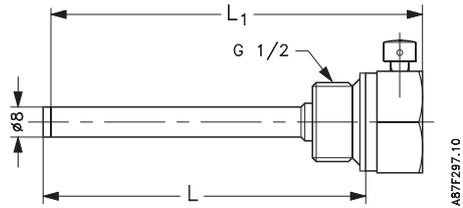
Sensor pocket (stainless steel), dimensions in mm (in)
